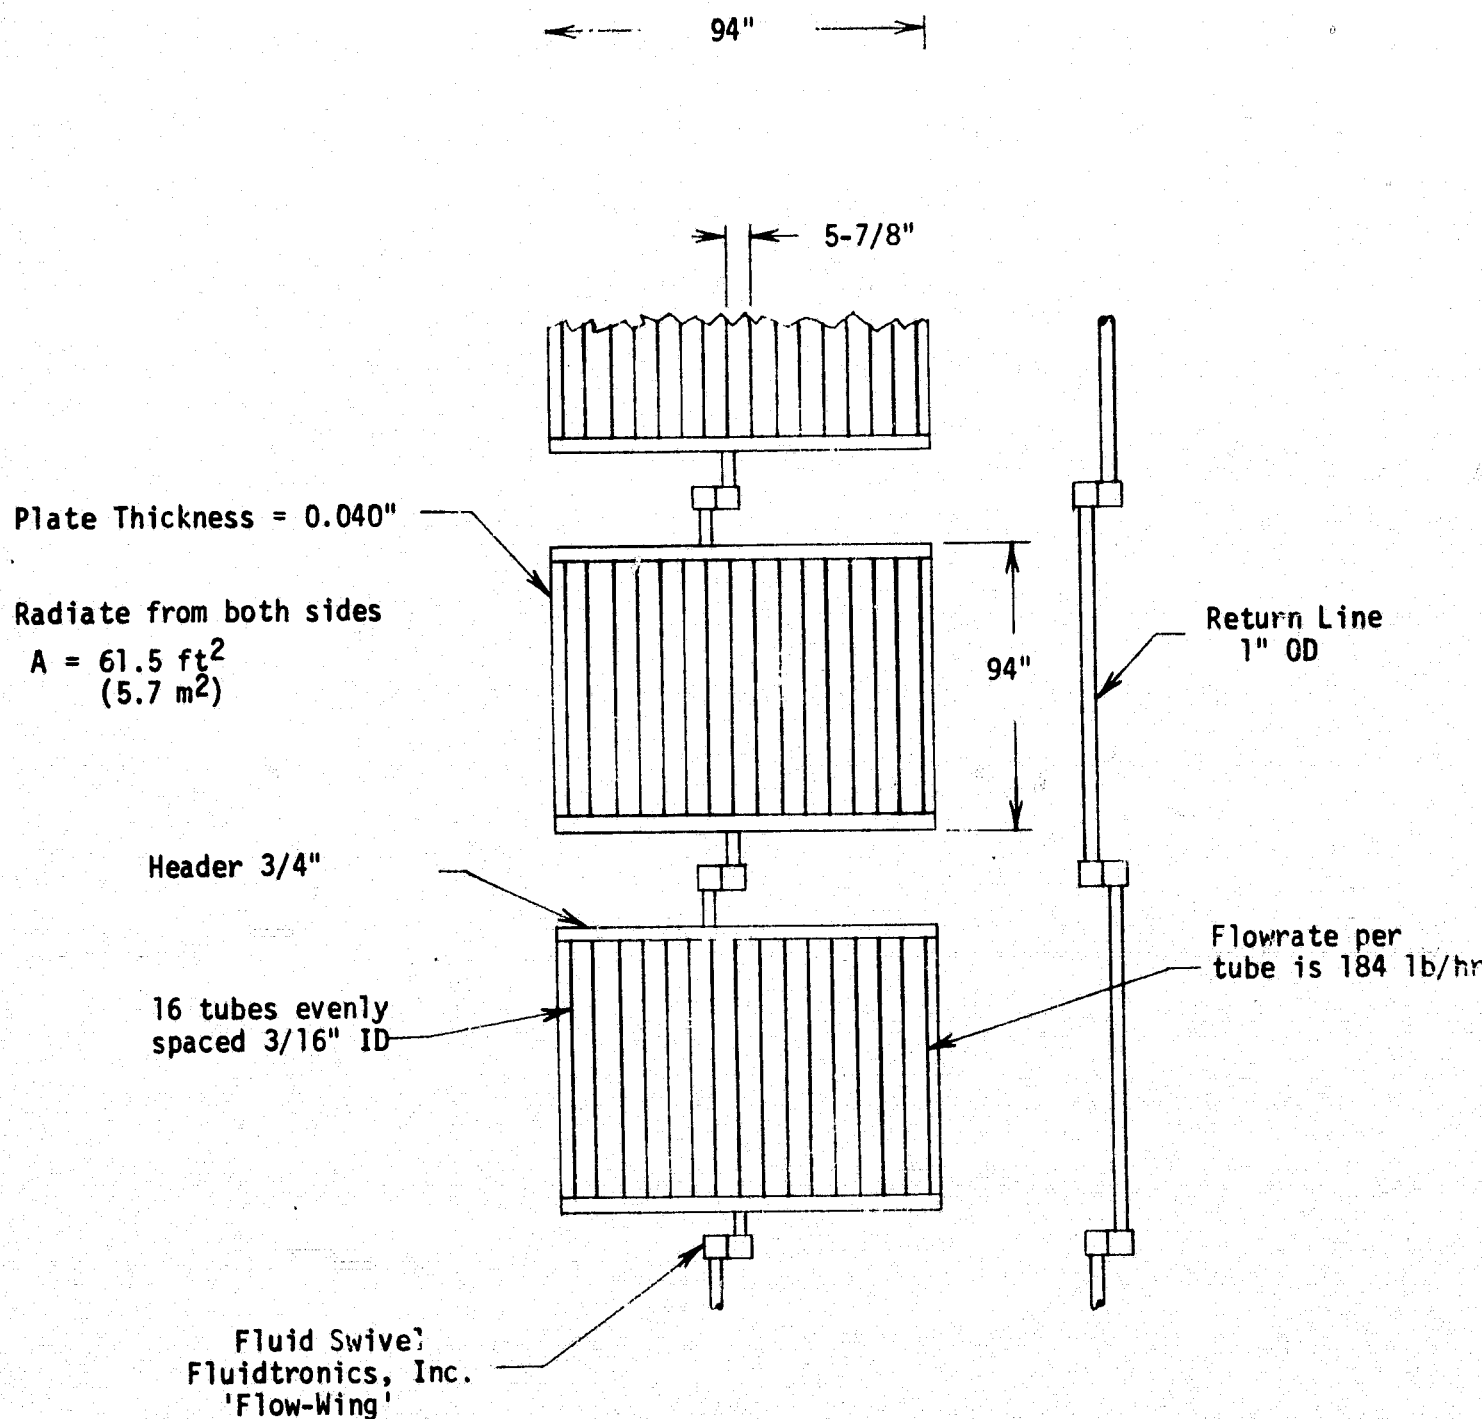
HIGH TEMPERATURE RADIATOR TUBE AND MANIFOLD LAYOUT
